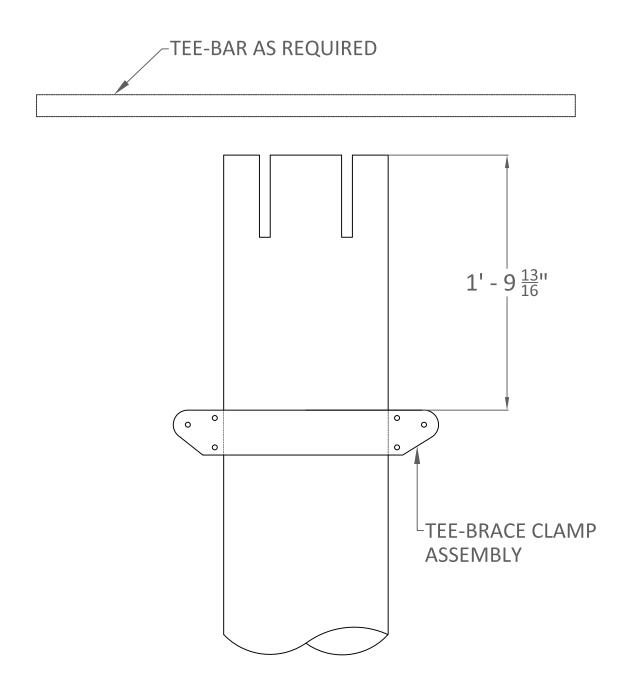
ATTACH TEE-BRACE CLAMP ASSEMBLY TO MS-20 MAST (Ref. Section 9.4.2)
